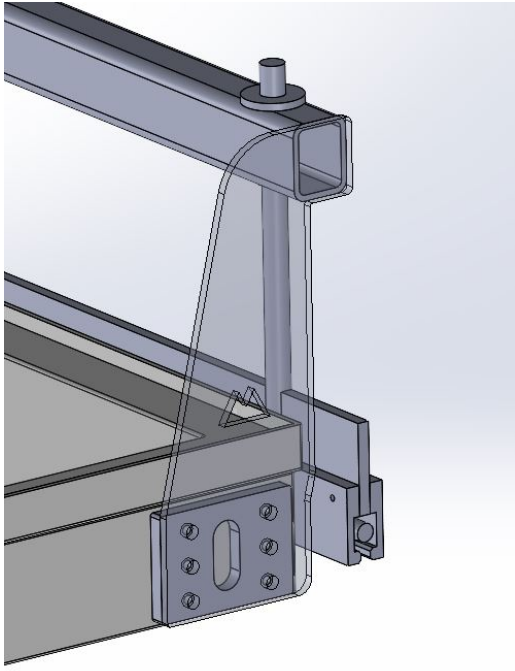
Front side mounting of the tensioner frame with the threaded plate that is to be welded to the lid frame
